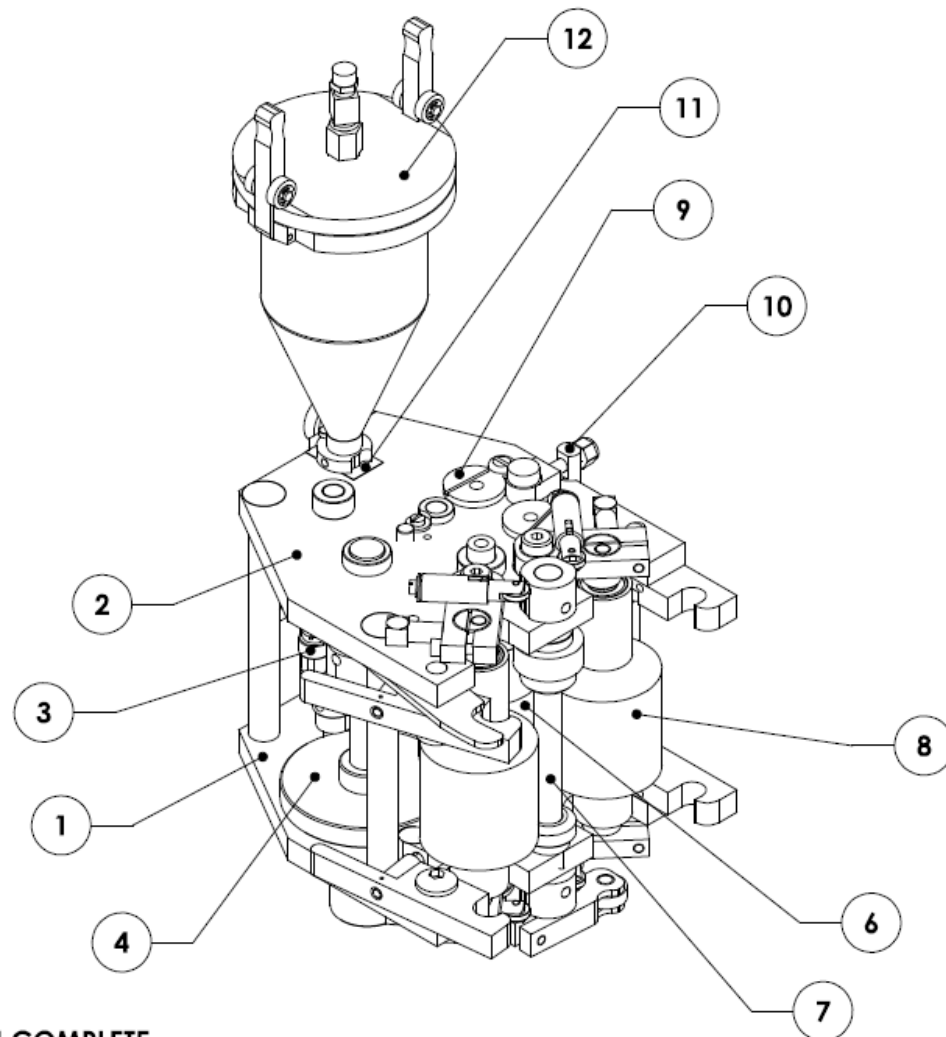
OS SIDE PRINTER PRINTING PLATE WF
